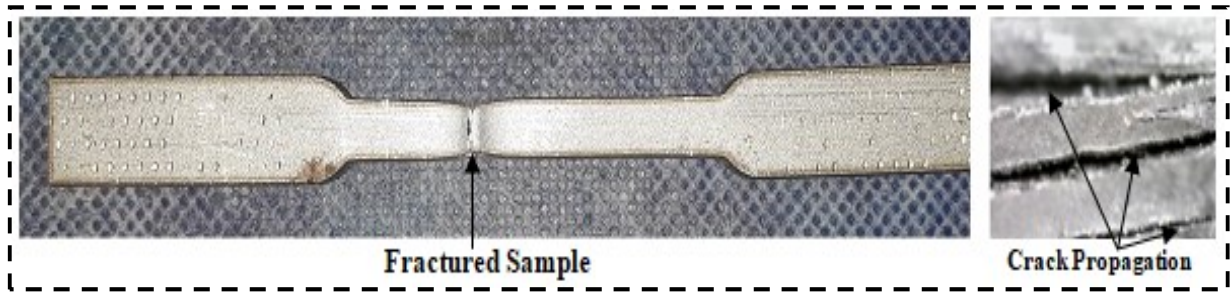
Sample of tensile test, a) after fracture and; b) fractography of the substrate (SS410)
